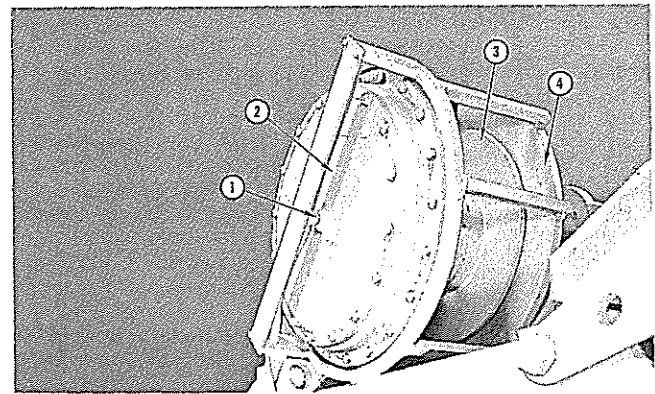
QUICK RELEASE CABLE DRUM
